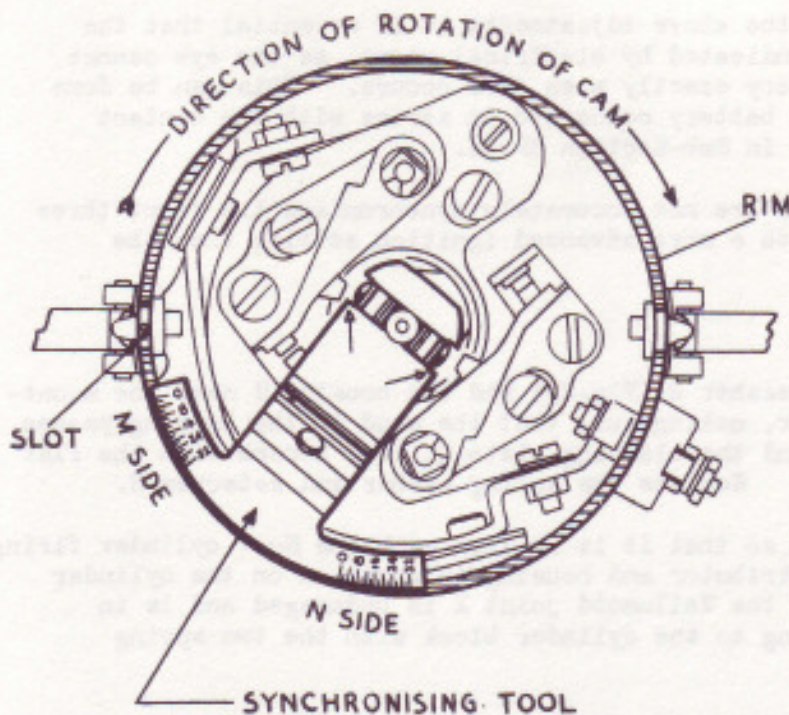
SYNCHRONISING TOOL IN POSITION.
